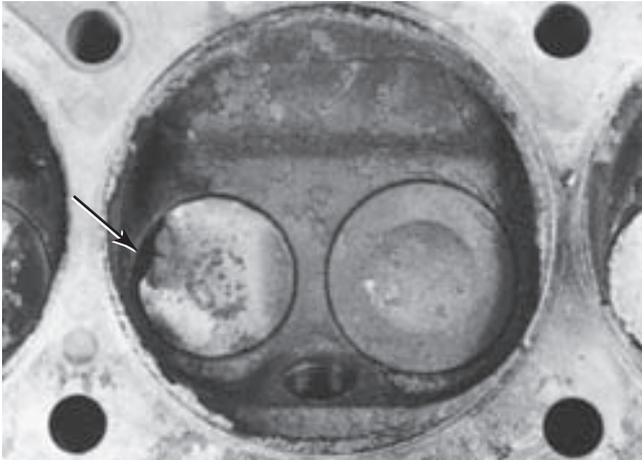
Badly burned exhaust valve. A compression test could have detected a problem, and a cylinder leakage test (leak-down test) could have been used to determine the exact problem.
